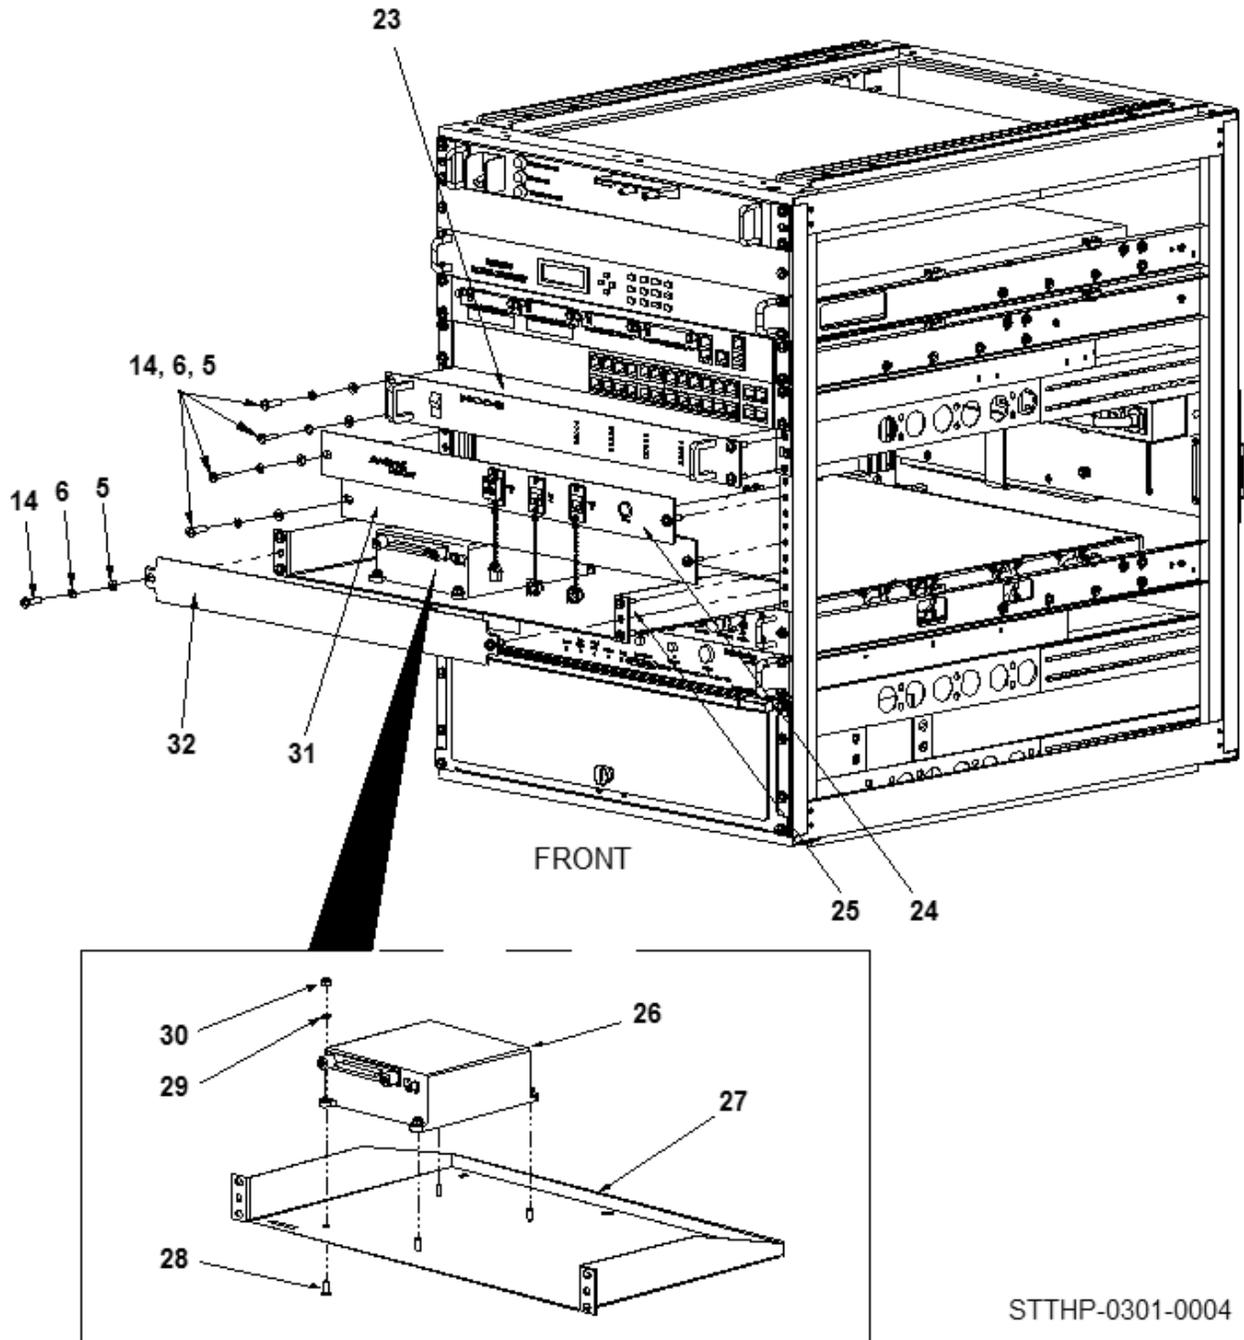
Electronics Components Assembly - Group 0301 (Sheet 2 of 9).
